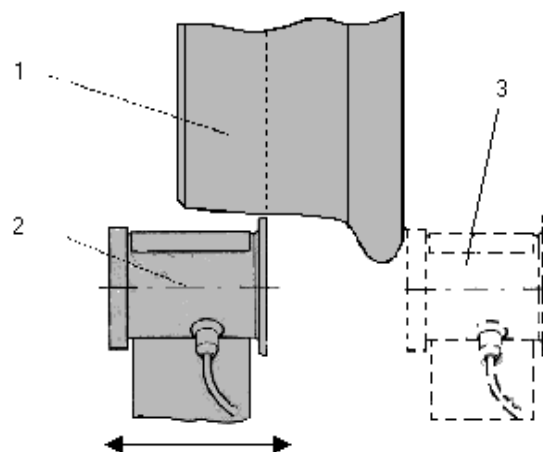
A schematic view of flange thickness measurement: 1 – wheel tyre, 2 – wear gauge; 3 – initial position of the gauge
